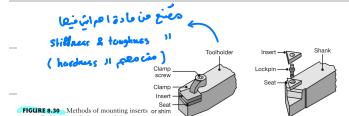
Methods of mounting inserts on toolholders: (a) clamping, and (b) using lockpins. Source: Courtesy of Valenite.
